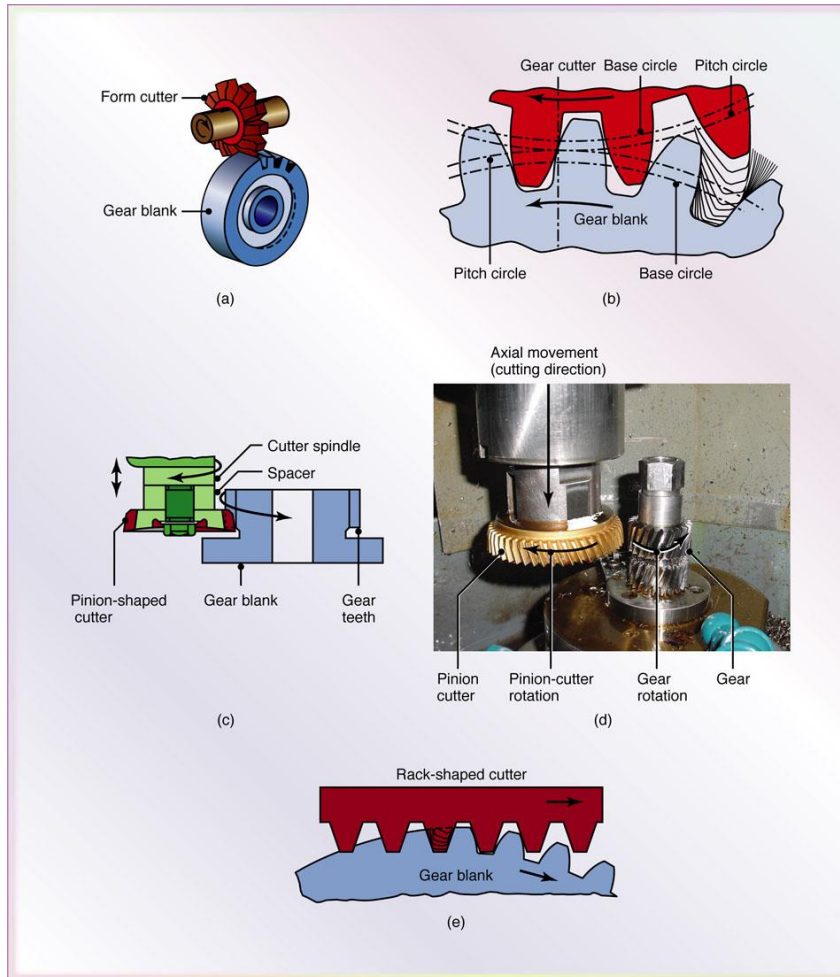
(a) Producing gear teeth on a blank by form cutting. (b) Schematic illustration of gear generating with a pinion-shaped gear cutter. (c) and (d) Gear generating on a gear shaper using a pinion-shaped cutter. Note that the cutter reciprocates vertically. (e) Gear generating with rack-shaped cutter. *Source:* (d) Schafer Gear Works, Inc.
